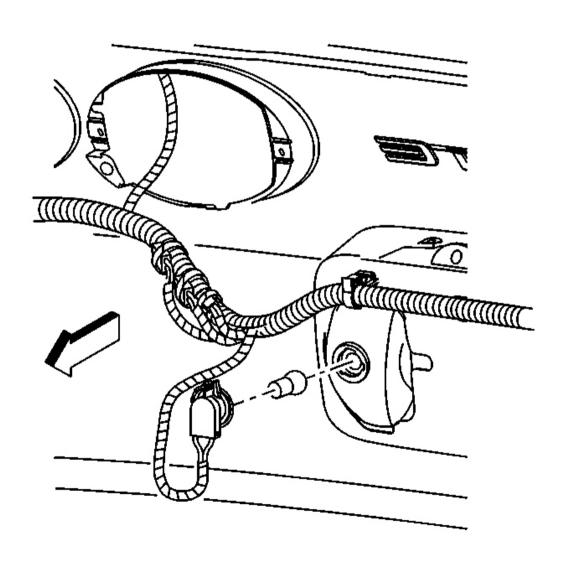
Backup Lamp Socket To Backup Lamp Assembly Courtesy of GENERAL MOTORS CORP.
